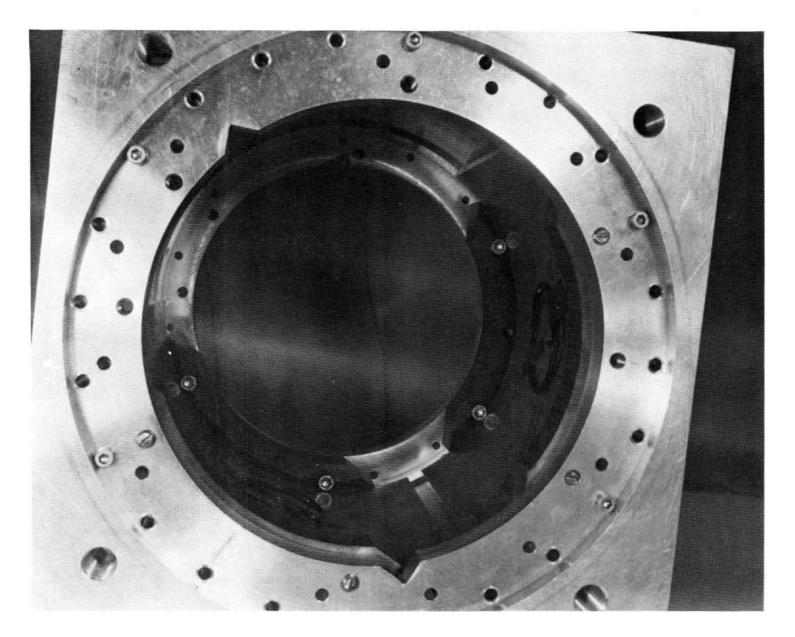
"Buckle-Capture" Mandrel Segments Partially Installed in Test Specimen
